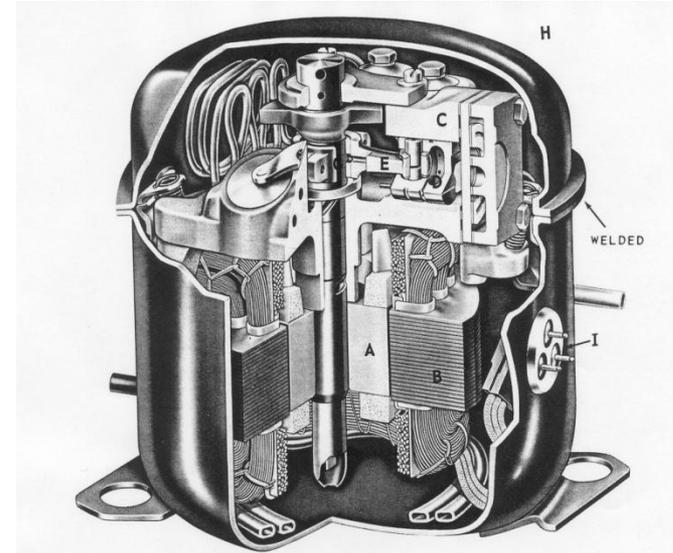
Reciprocating hermetic compressor. Compressor is at top and motor at bottom. Assembly is mounted on springs inside dome. A—Motor rotor. B—Motor stator. C—Compressor cylinder. D—Compressor piston. E—Connecting rod. F—Crankshaft. G—Crank throw. H—Compressor shell. I—Glass sealed electrical connections through compressor dome. (Tecumseh Products Co.)
